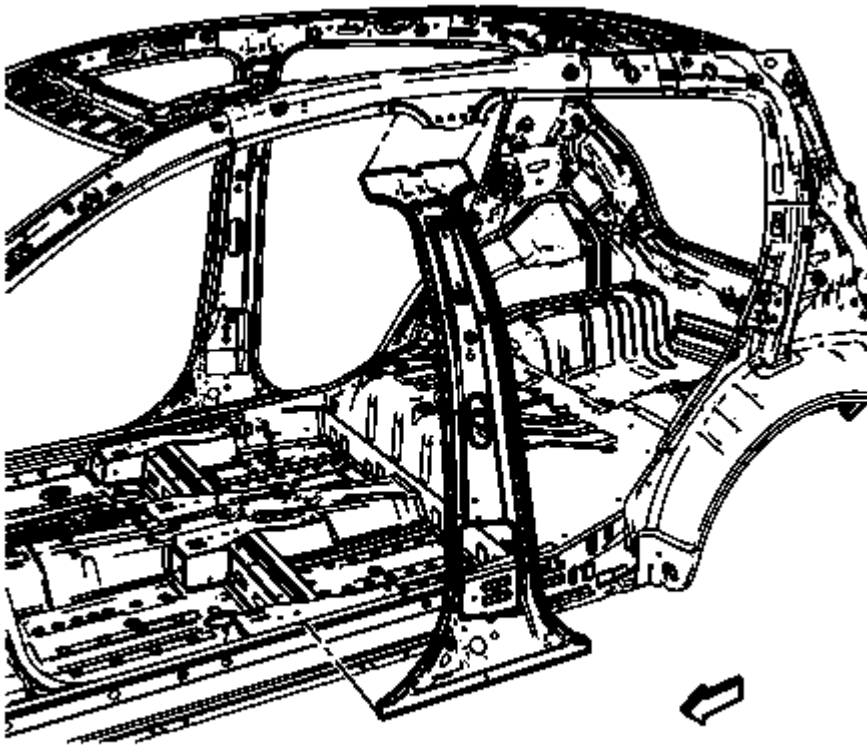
Removing Damaged Body Lock Pillar Inner Panel
